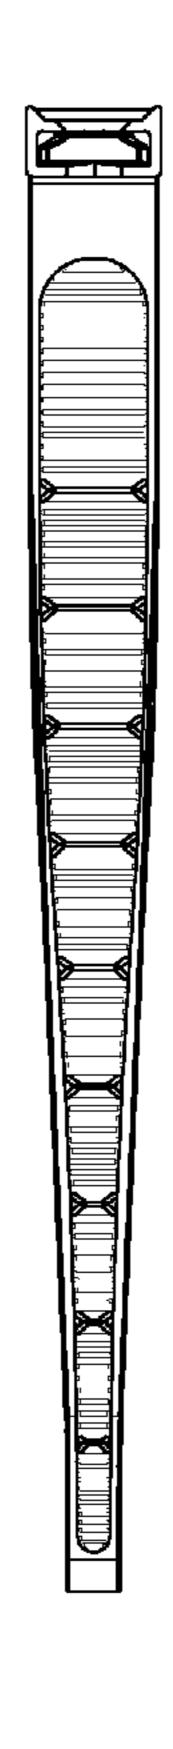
is a bottom view of the twist in shelving support bracket arm and support assembly.
